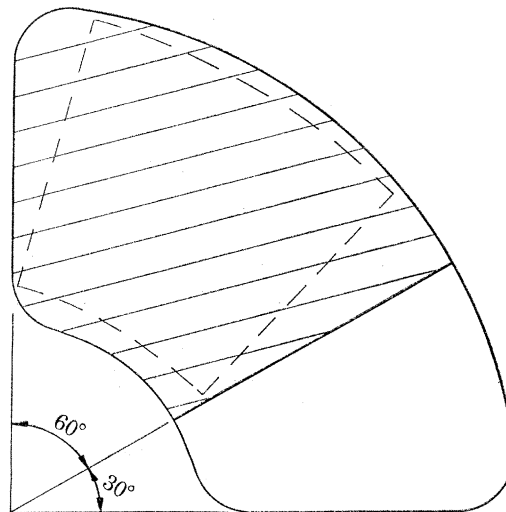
Hydrostatic bearing recess and thrust pad.
